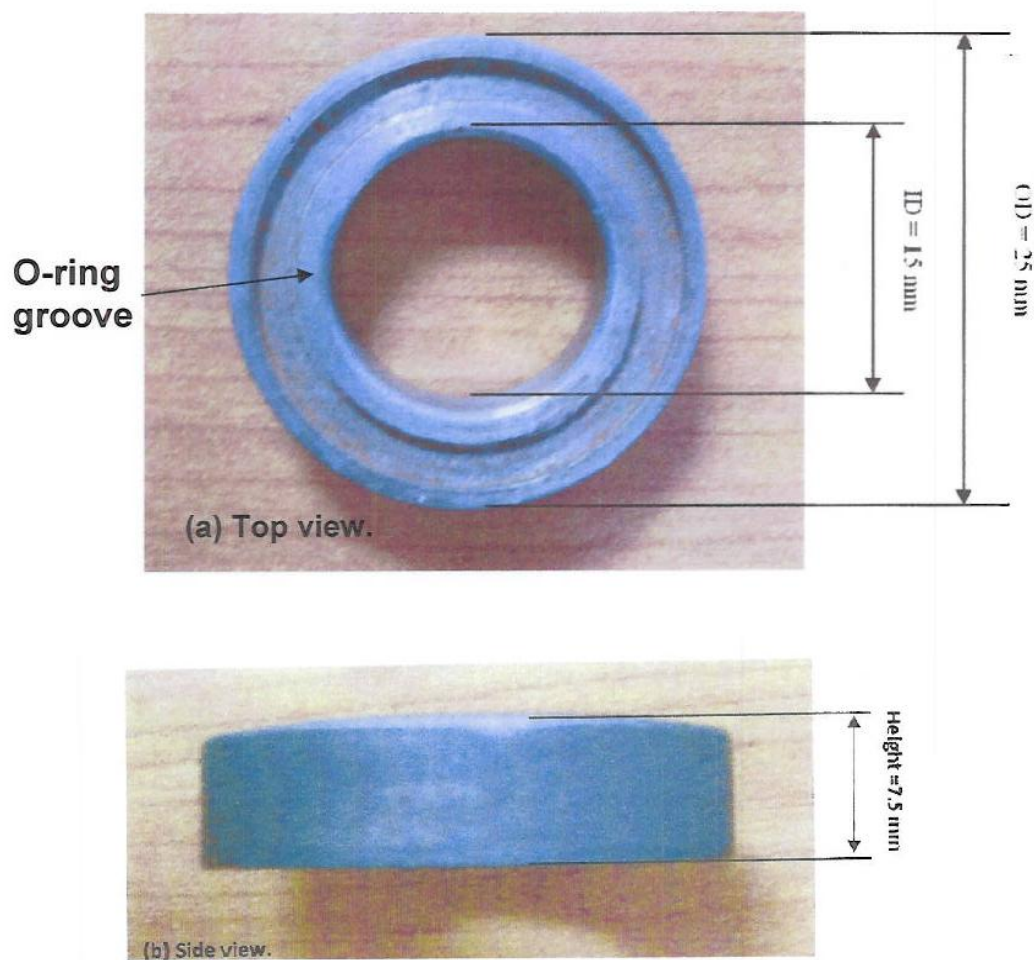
The dimensions of the working electrode: (a) Top view; (b) side view.
